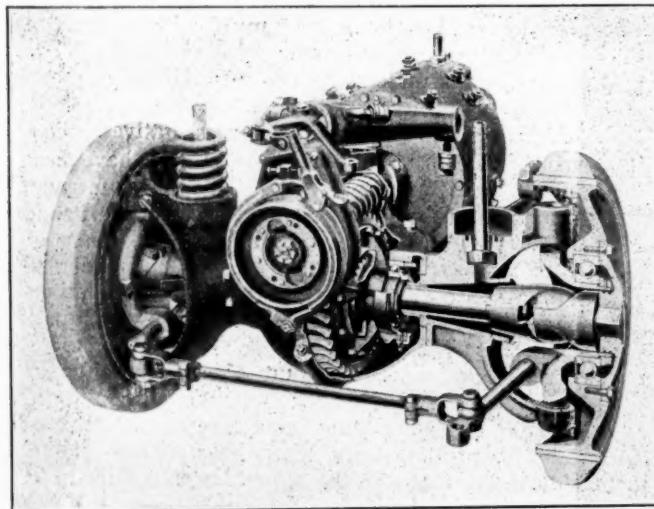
Driving Axle of Baker Truck Equipped with Duplex Compensating Suspension
